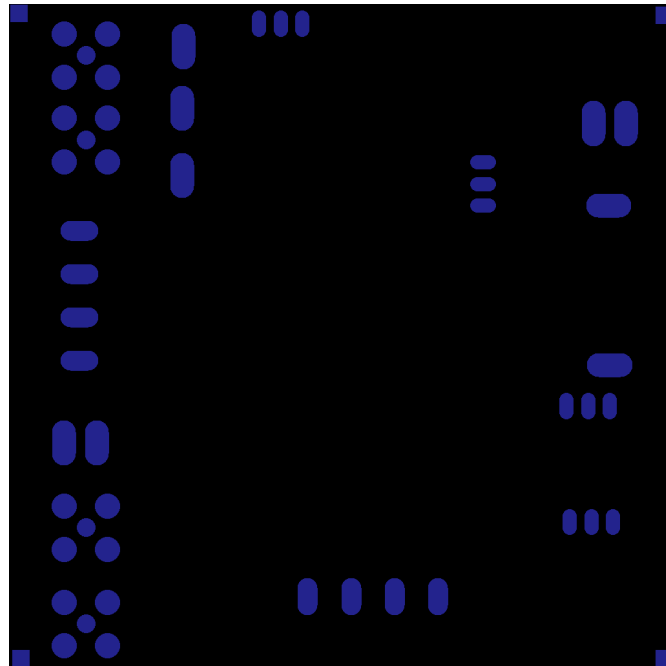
Bottom Soldermask Layer of PCB Board
